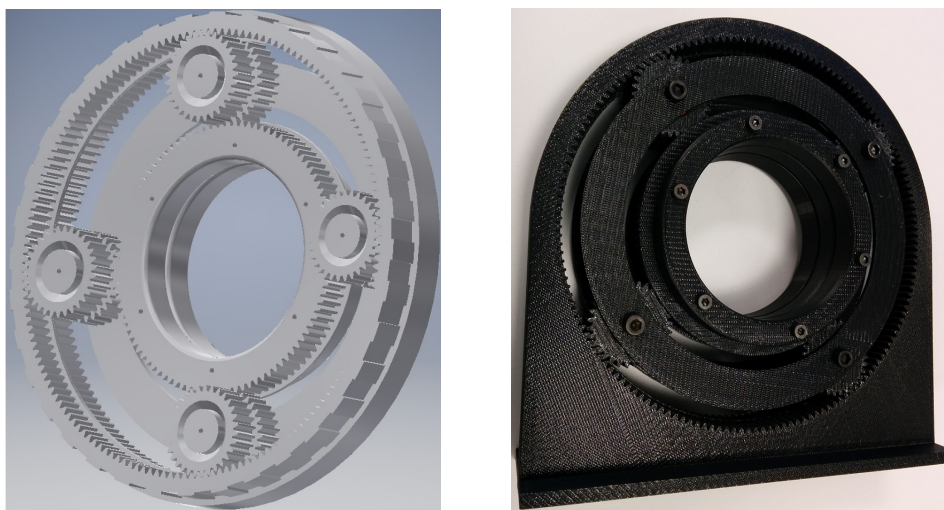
Example gearbox design with tooth correction. Left: CAD rendering. Right: 3D printed prototype.
